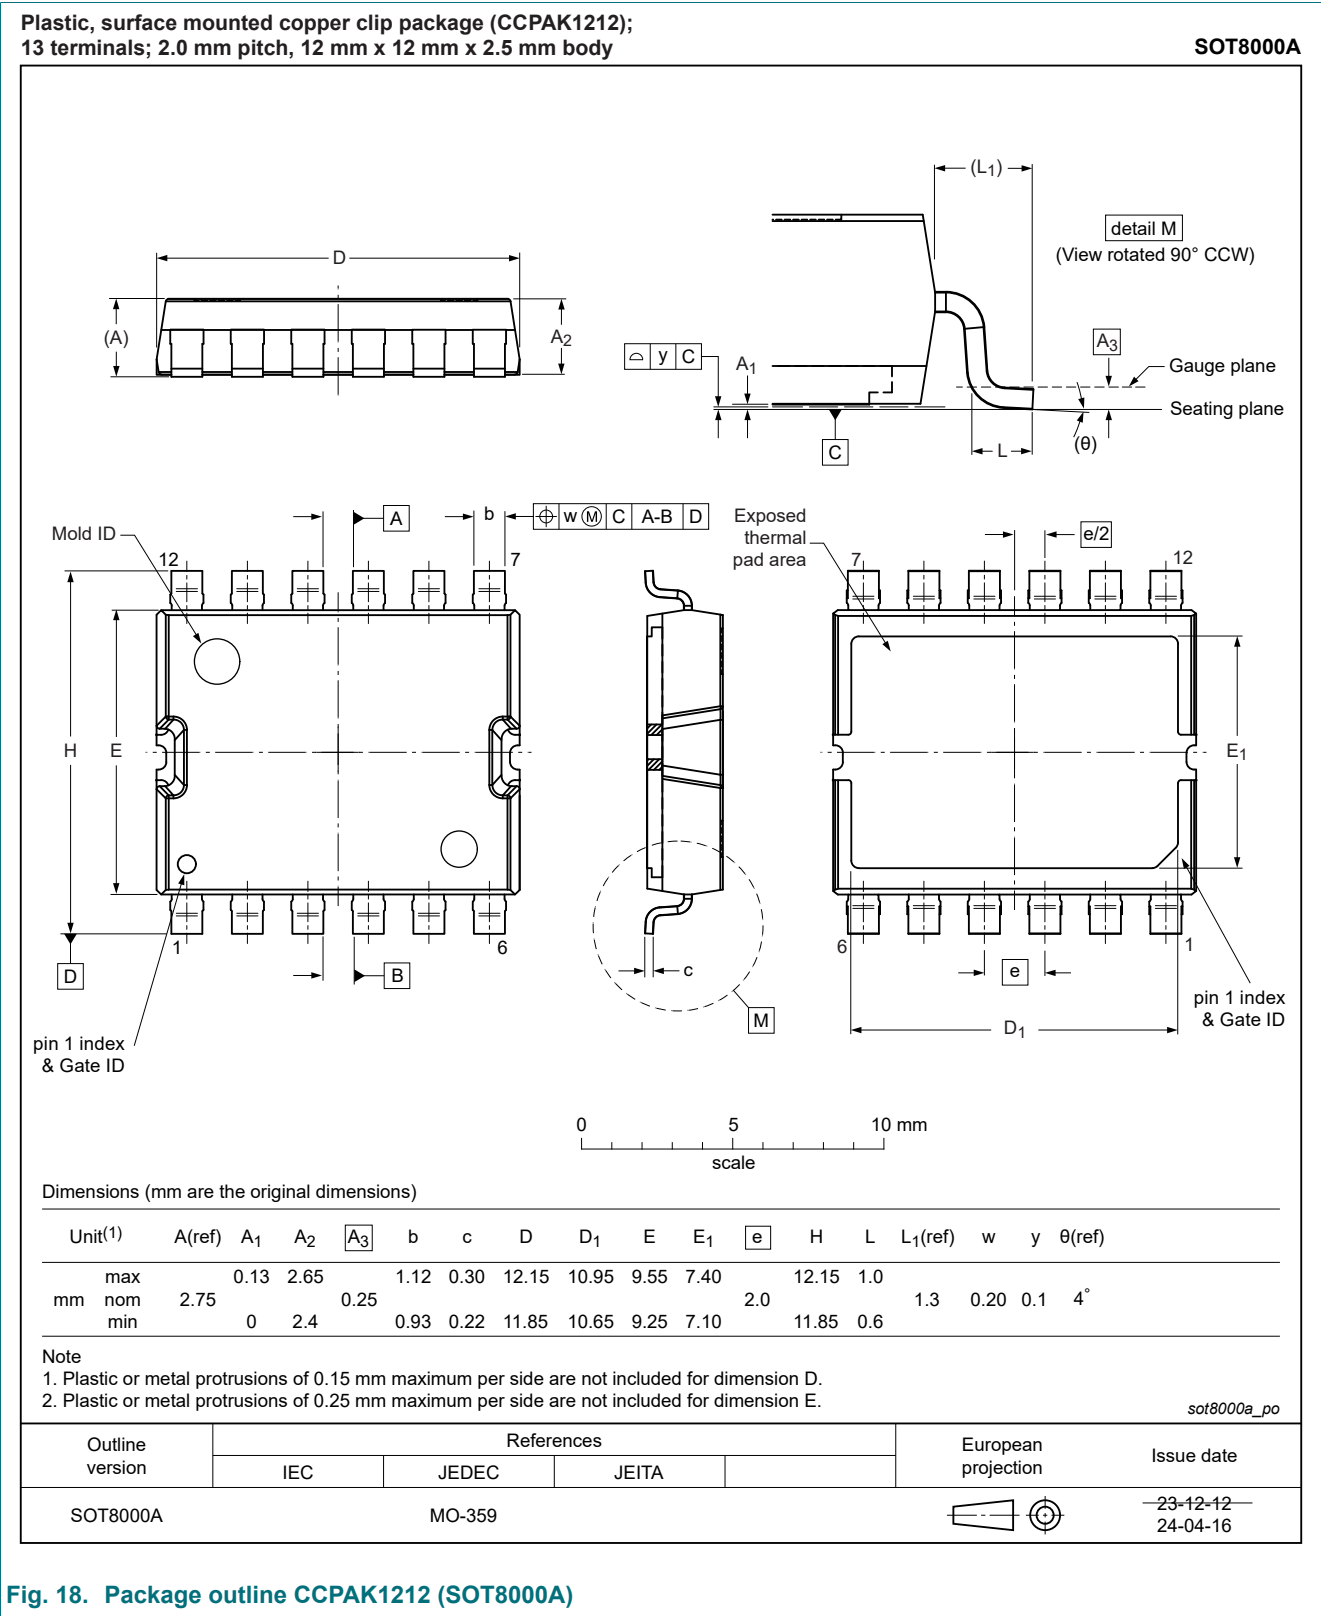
Package outline CCPAK1212 (SOT8000A)
